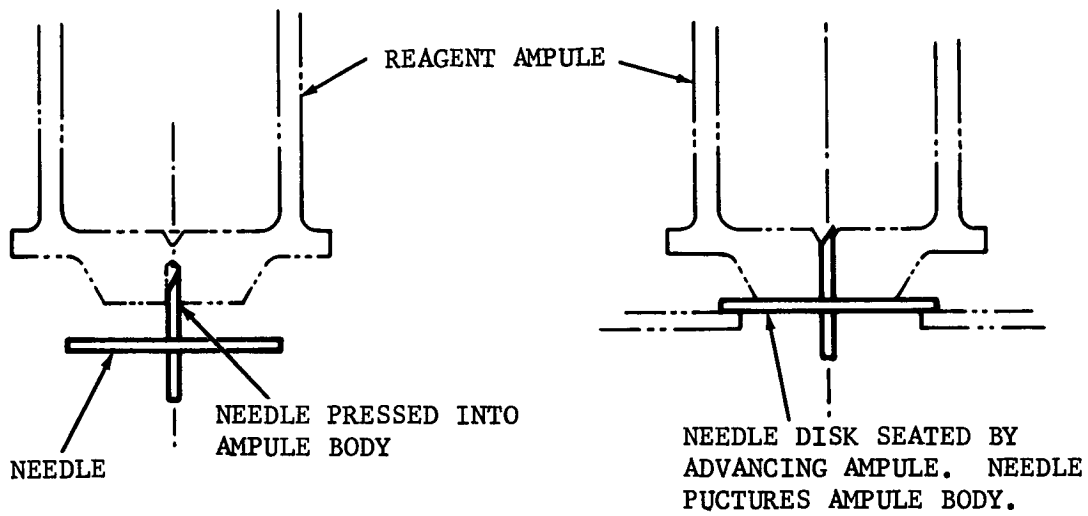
AMPULE ASSEMBLY PISTON
